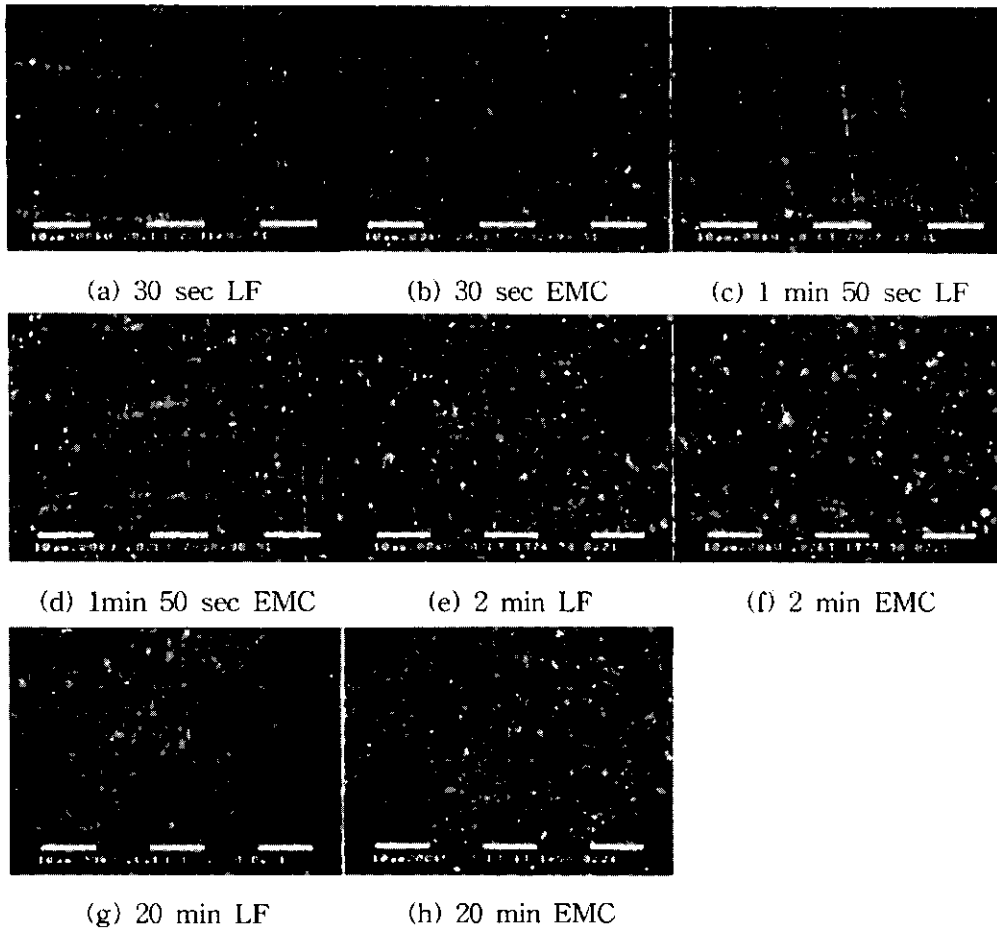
Fractographs from the leadframe part and the EMC part after SDCB tests.
